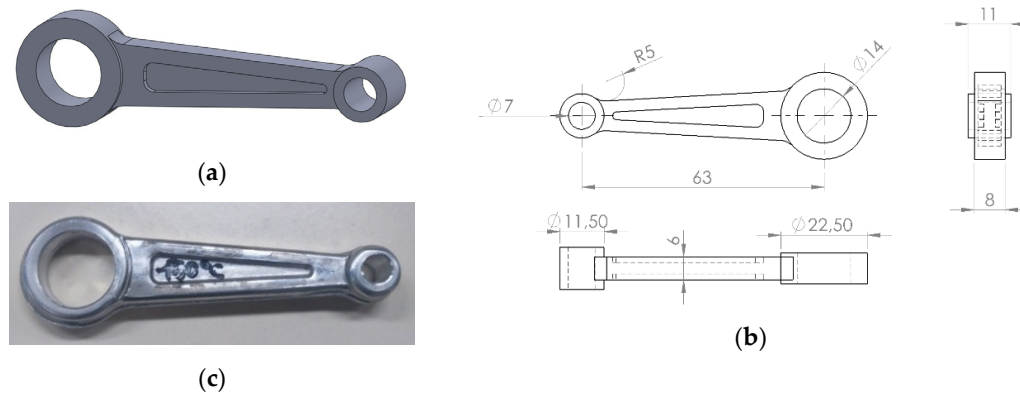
(a) CAD Design; (b) dimensions of the connecting rod; (c) connecting rod manufactured.
